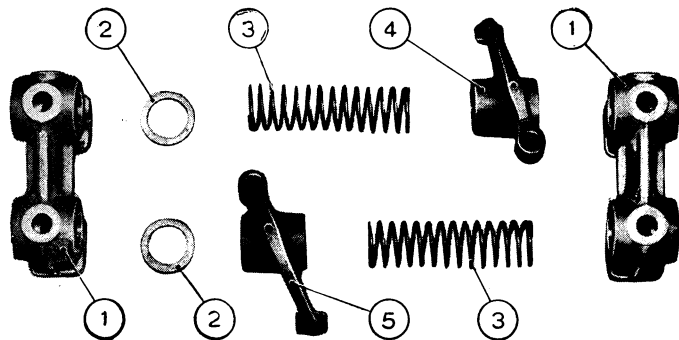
Components of a valve rocker assembly (engine 115 C.005).
